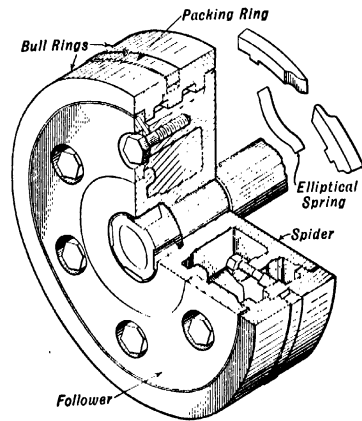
Built-up Piston, with Narrow Follower and Elliptical Spring.
